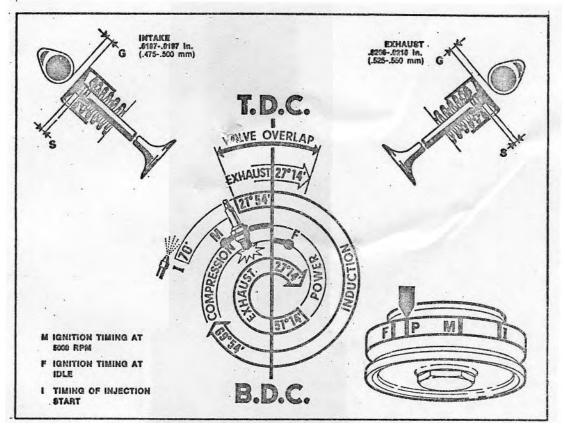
VALVE CLEARANCE AND VALVE TIMING DIAGRAM
